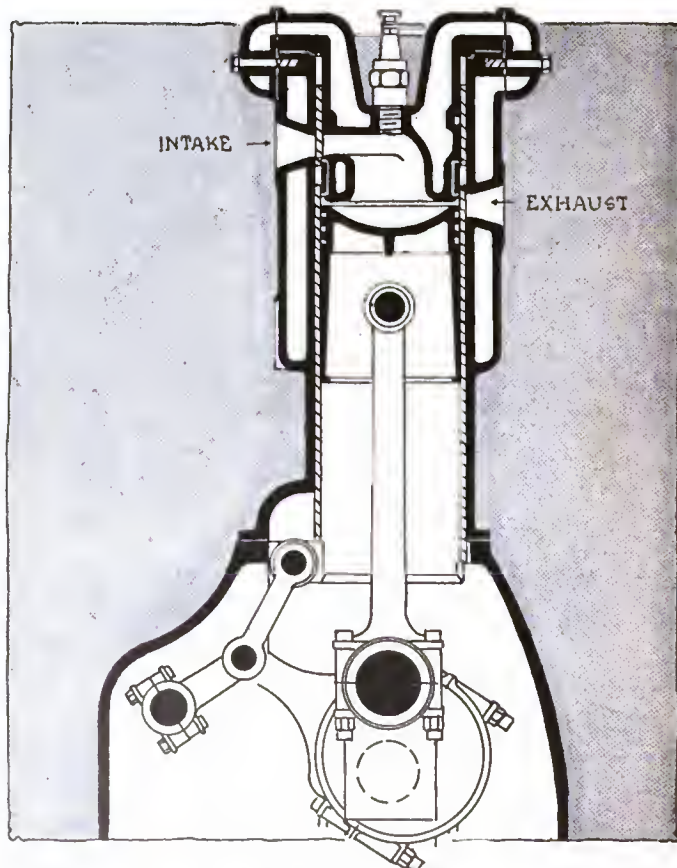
Wolseley sleeve-valve motor with eccentric actuating mechanism
